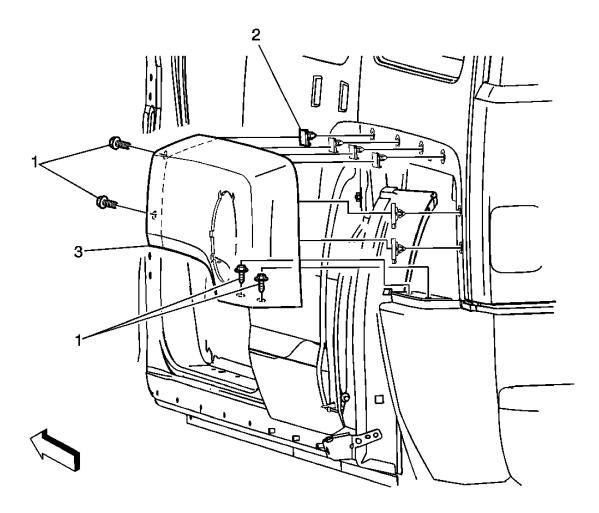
Wheel Opening Flare Replacement - Rear (Wheelhouse) Courtesy of GENERAL MOTORS CORP.
